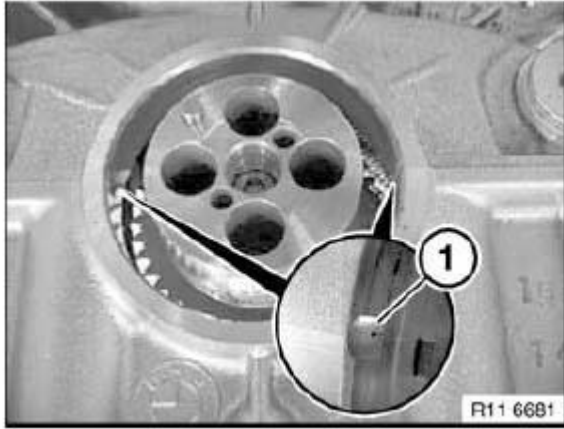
Inserting Special Tool (11 6 360) Into Radial Shaft Seal
